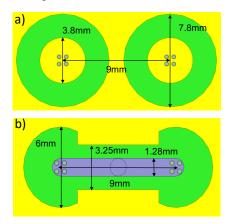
Schematics and dimensions of the RF applicator, which radiates electromagnetic waves into 2 wells: (a). Top view (b). Bottom view.
